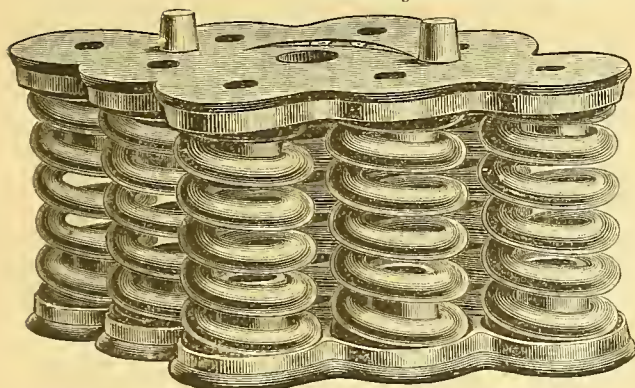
NINE GROUP SINGLE-COIL BOLSTER-SPRING.
